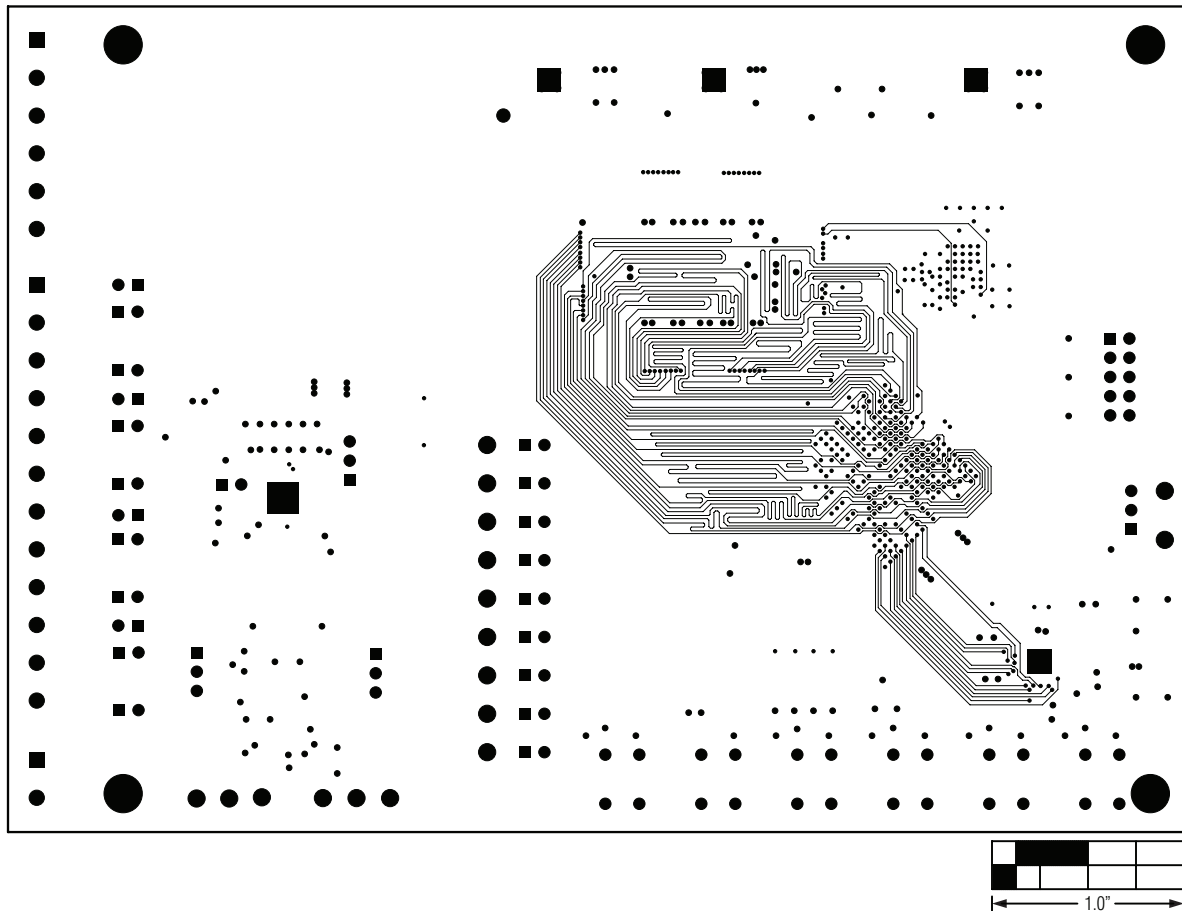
MAX11043 EV Kit PCB Layout—Power Layer 5
